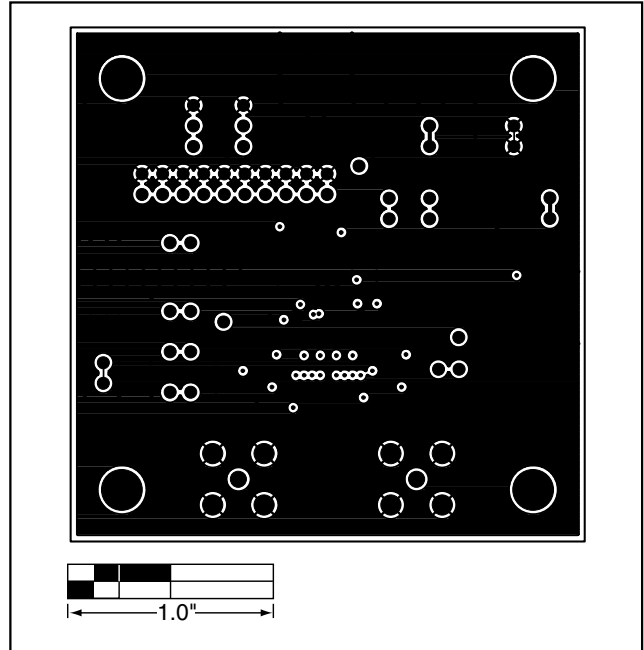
MAX2394/MAX2395 EV Kits PC Board Layout—Inner Layer 2
